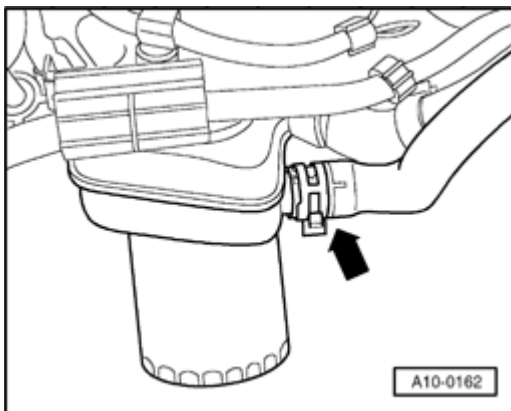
Disconnecting Bottom Coolant Hose At Oil Cooler To Drain Off Remaining Coolant
